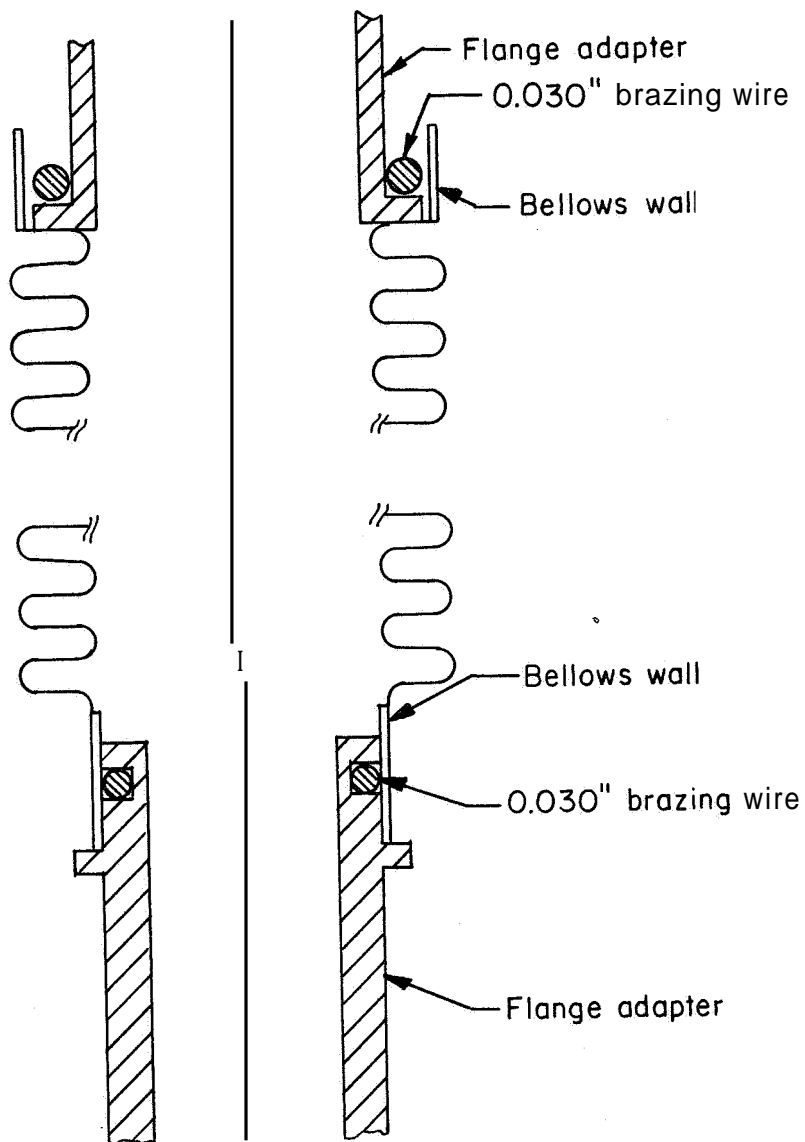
TYPICAL JOINTS USED FOR BRAZING STAINLESS STEEL BELLOWS TO FLANGE ADAPTERS FOR VACUUM SERVICE (Ref. 82)
